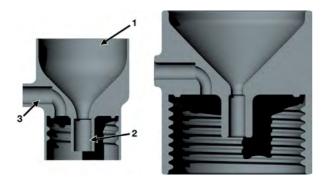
Cutaway view of the 3D printed bottle caps, with funnel (1), offset formed vent tube holder (2) and central inlet tube holder (3) (Left, cap for 225 ml bottles, right cap for 2 L bottle).
